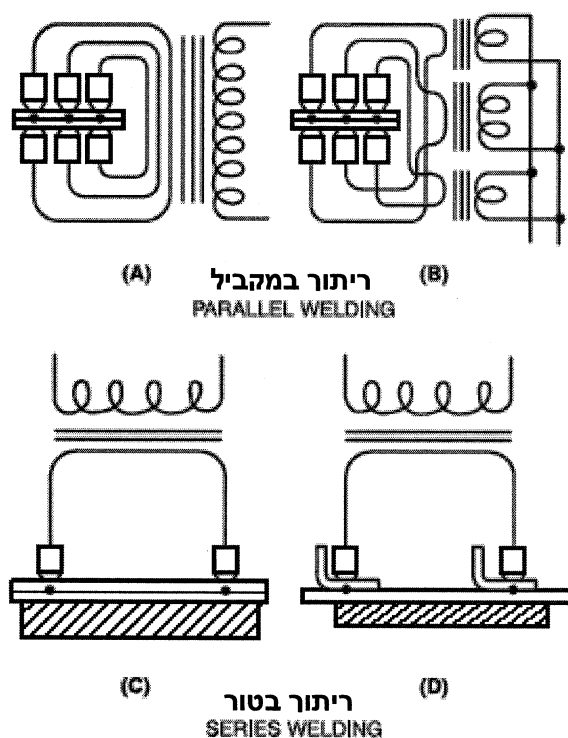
Typical Arrangements for Multiple Spot Welding
